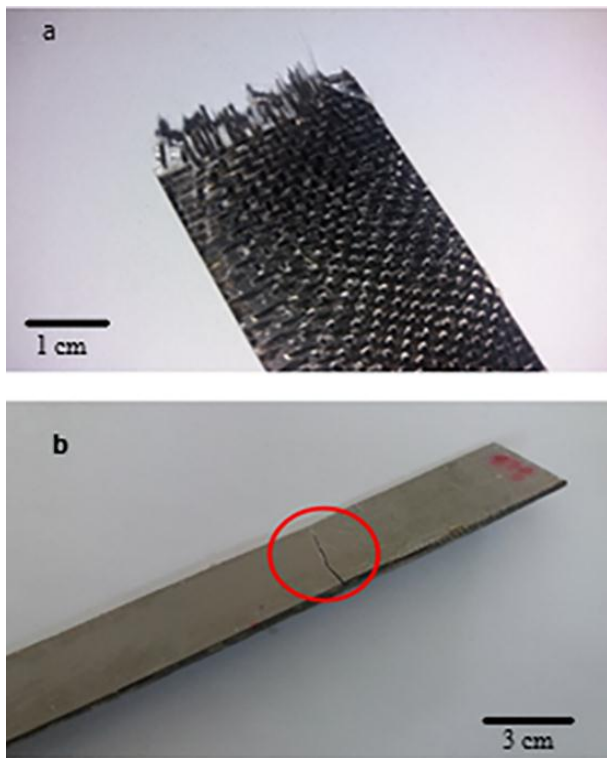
Overall view of fractured sample a) CFRP and b) Al1C2 after tensile test
